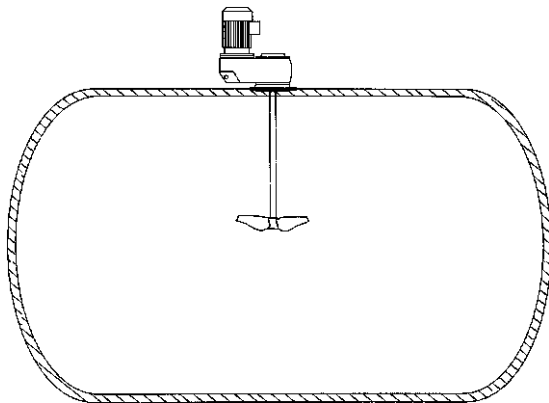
Top-entering mixer for horizontal cylindrical vessel.
